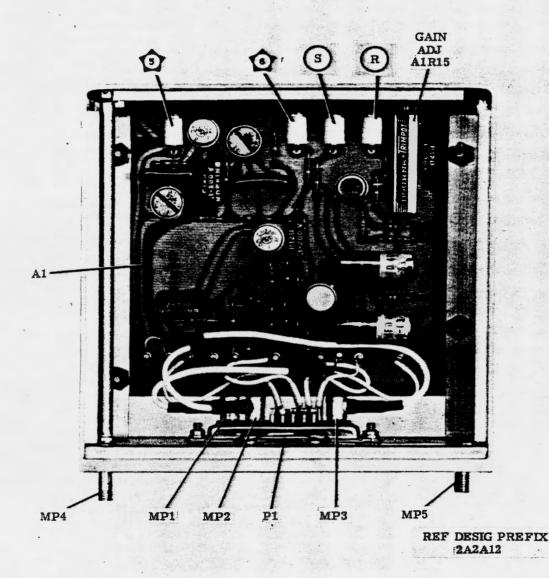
Transmitter IF. Amplifier Electronic Assembly, Component Location
